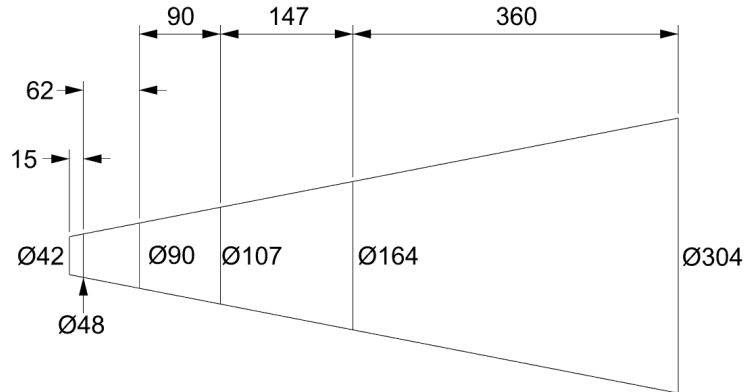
Drawing of the Power Transmission used in the Daisy Kite Prototype. All dimensions shown are in centimetres.
